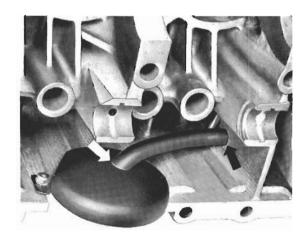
Crankcase halves being separated. Note the spring clips holding the cam followers.
